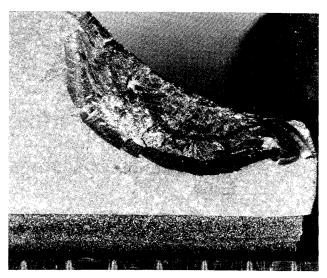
Inner race crack of bearing operated at 27,000 psi tangential stress giving a  $K_I$  – 13.4 ksi (in.)<sup>1/2</sup> bearing No. 8, Table 1.
